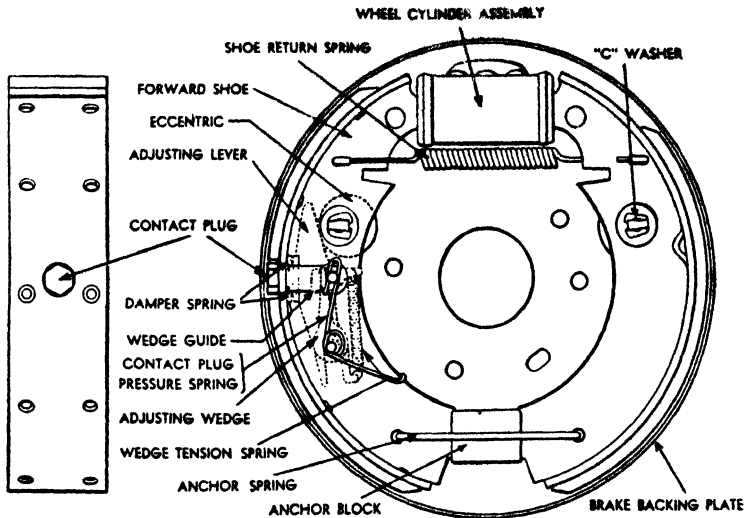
STUDEBAKER BRAKE SELF-ADJUSTING MECHANISM.
